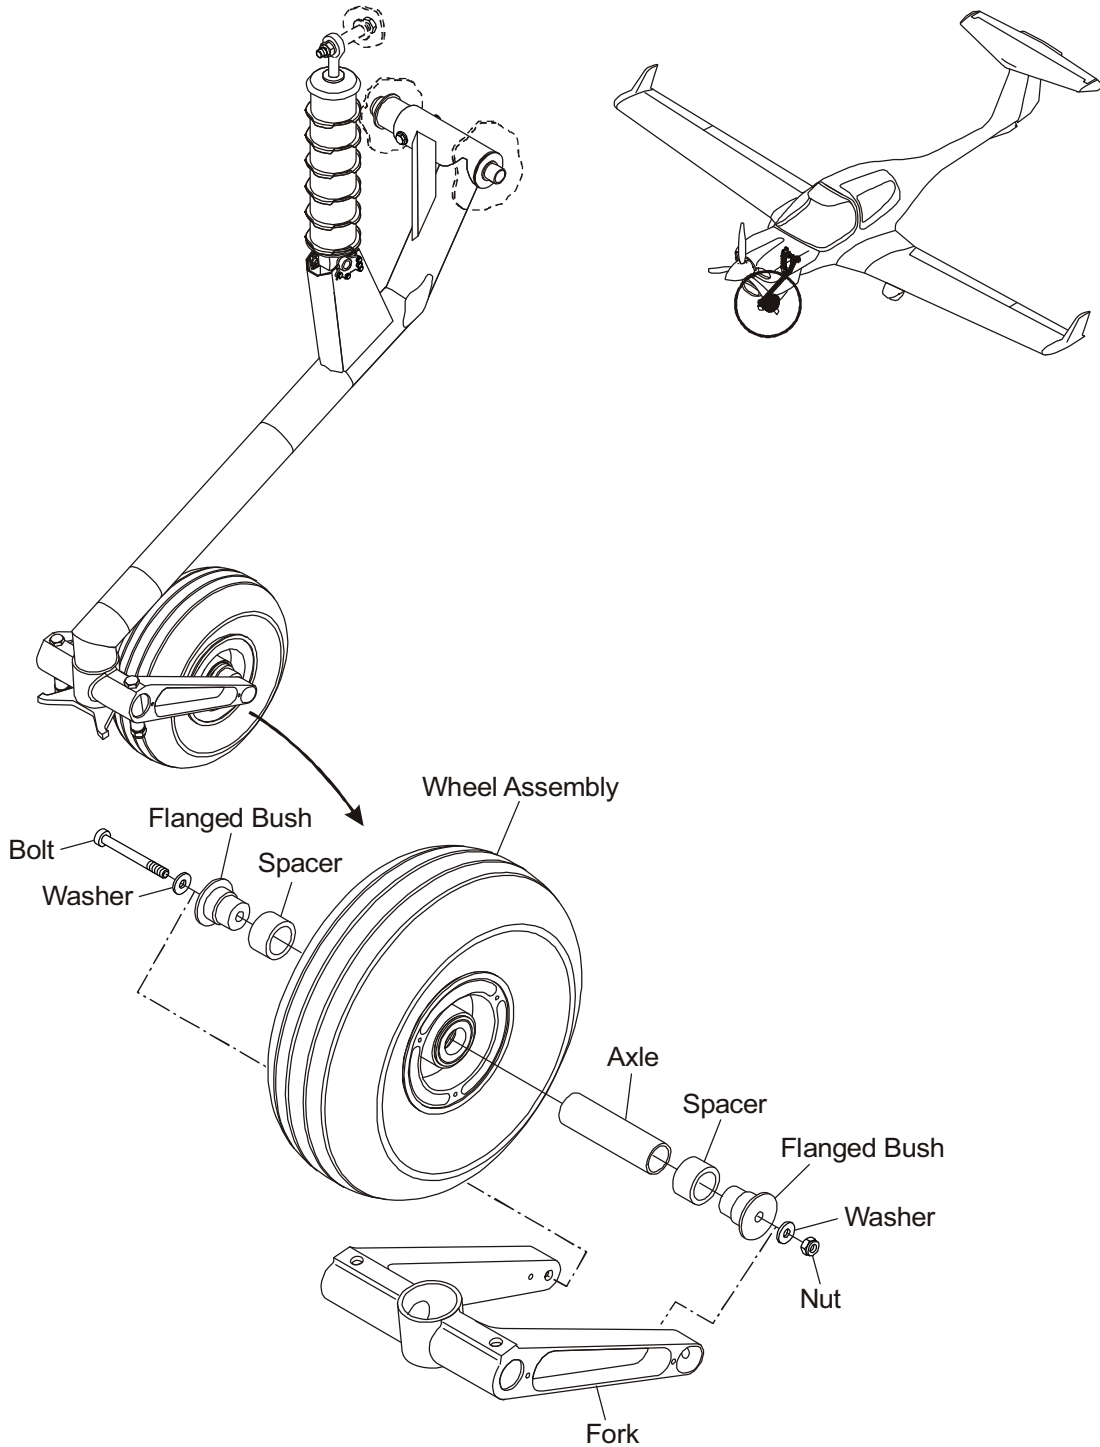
Nose Wheel Assembly (if OÄM 40-334 is installed)
